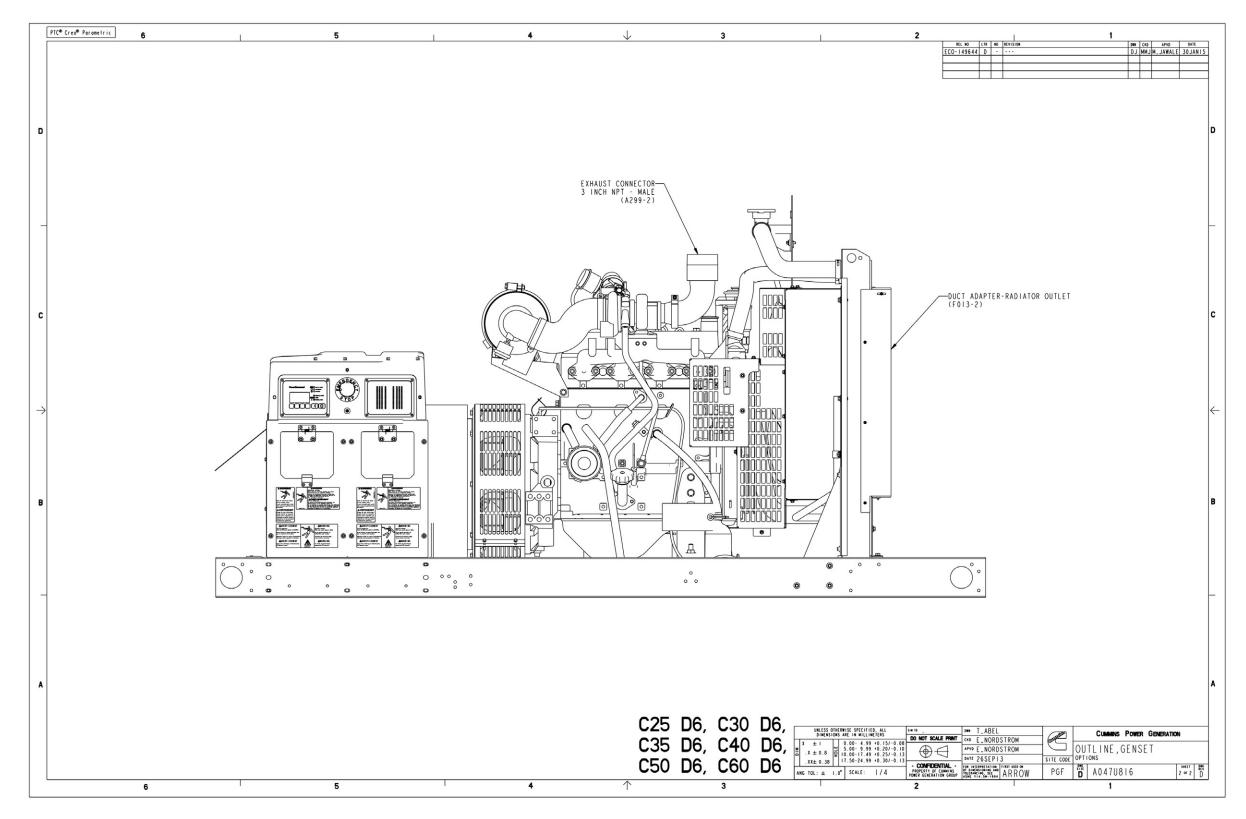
OUTLINE DRAWING (SHEET 2 OF 2)
